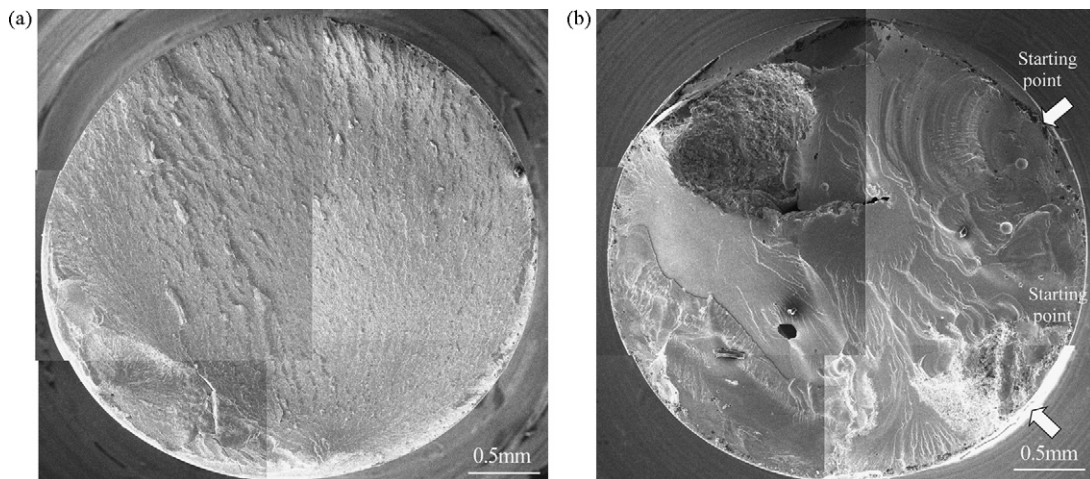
Fracture surfaces of the brazed specimens. Void area ratios of (a) and (b) are 0 and 10%, respectively.
